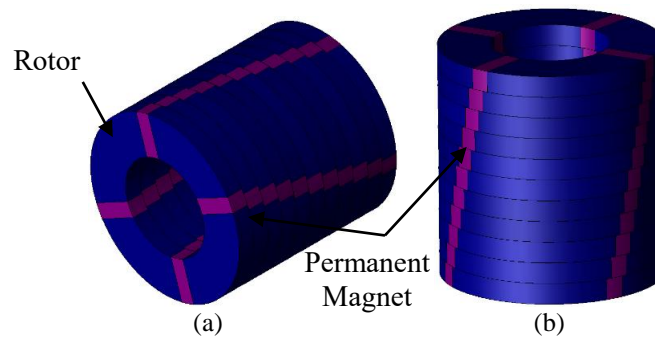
SkPop rotor model a) Isometric view b) Rotor top view
